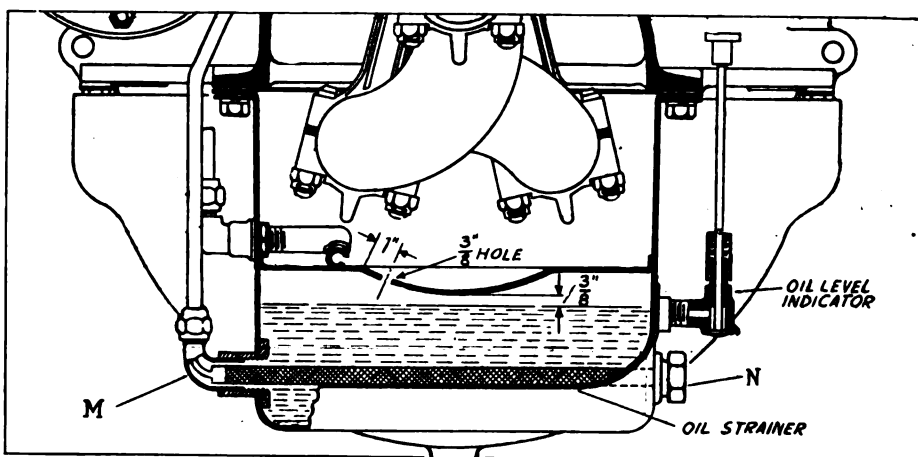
Section through crankcase, showing $\frac{3}{8}$ -in. overflow hole which may be drilled in the splash trough
